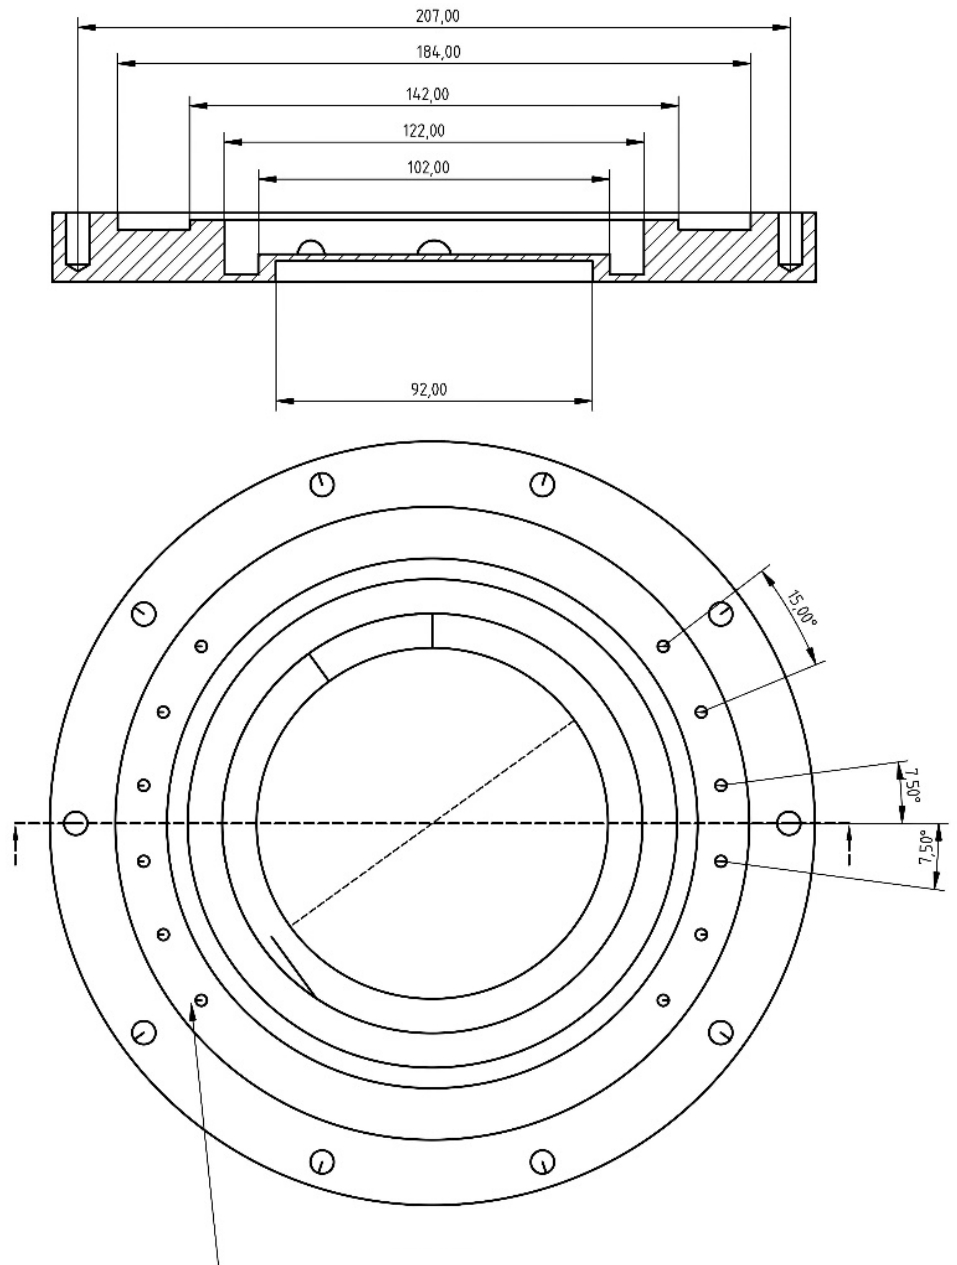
Technical drawings of the bottom part of the biofilm module in cross-section (top) and top view (bottom). Dimensions in millimeters and degrees.
